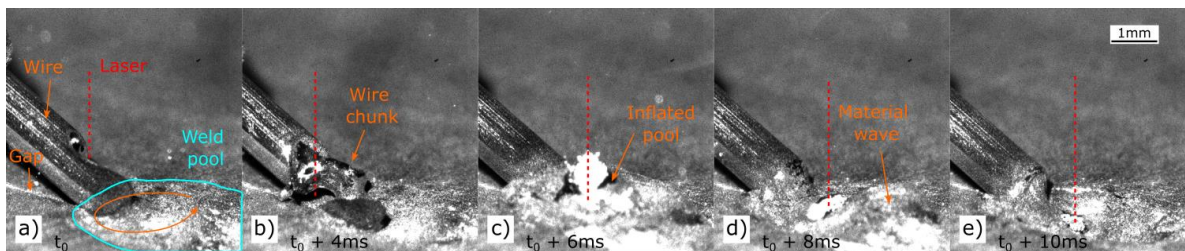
High-speed images of AW6005A-T6 welding with 1 mm gap. a) Laser starts to melt wire until b) a chunk of solid material is cut off and sinks in the pool; c) the pool gets inflated by the return of the laser and this generates a wave of molten material towards the tail of the pool d); e) after wave front has drifted, a throat momentarily remains in the pool that is then filled by recoil pressure
